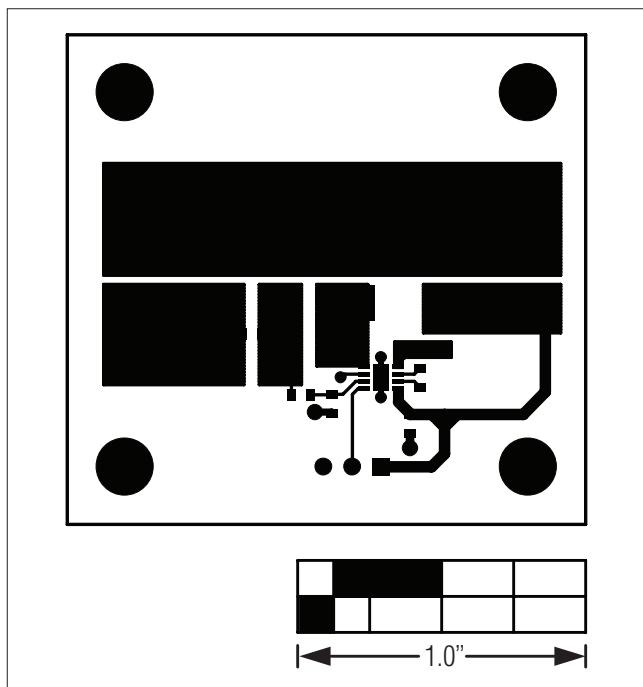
MAX15032 EV Kit PCB Layout—Component Side
